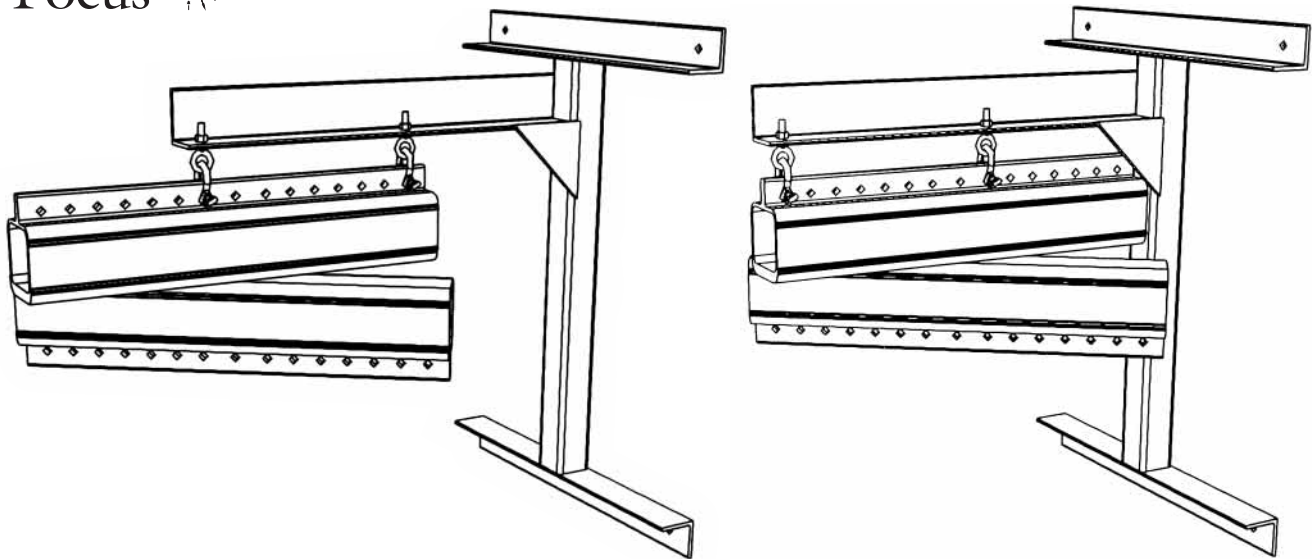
A Zbeam® in fully extended (left) and fully retracted (right) positions on a Zbeam® Wall Mount.
